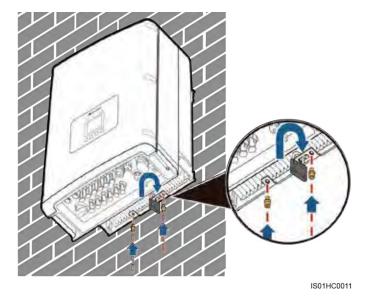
Mounting the SUN2000 on the rear panel (rear view)
